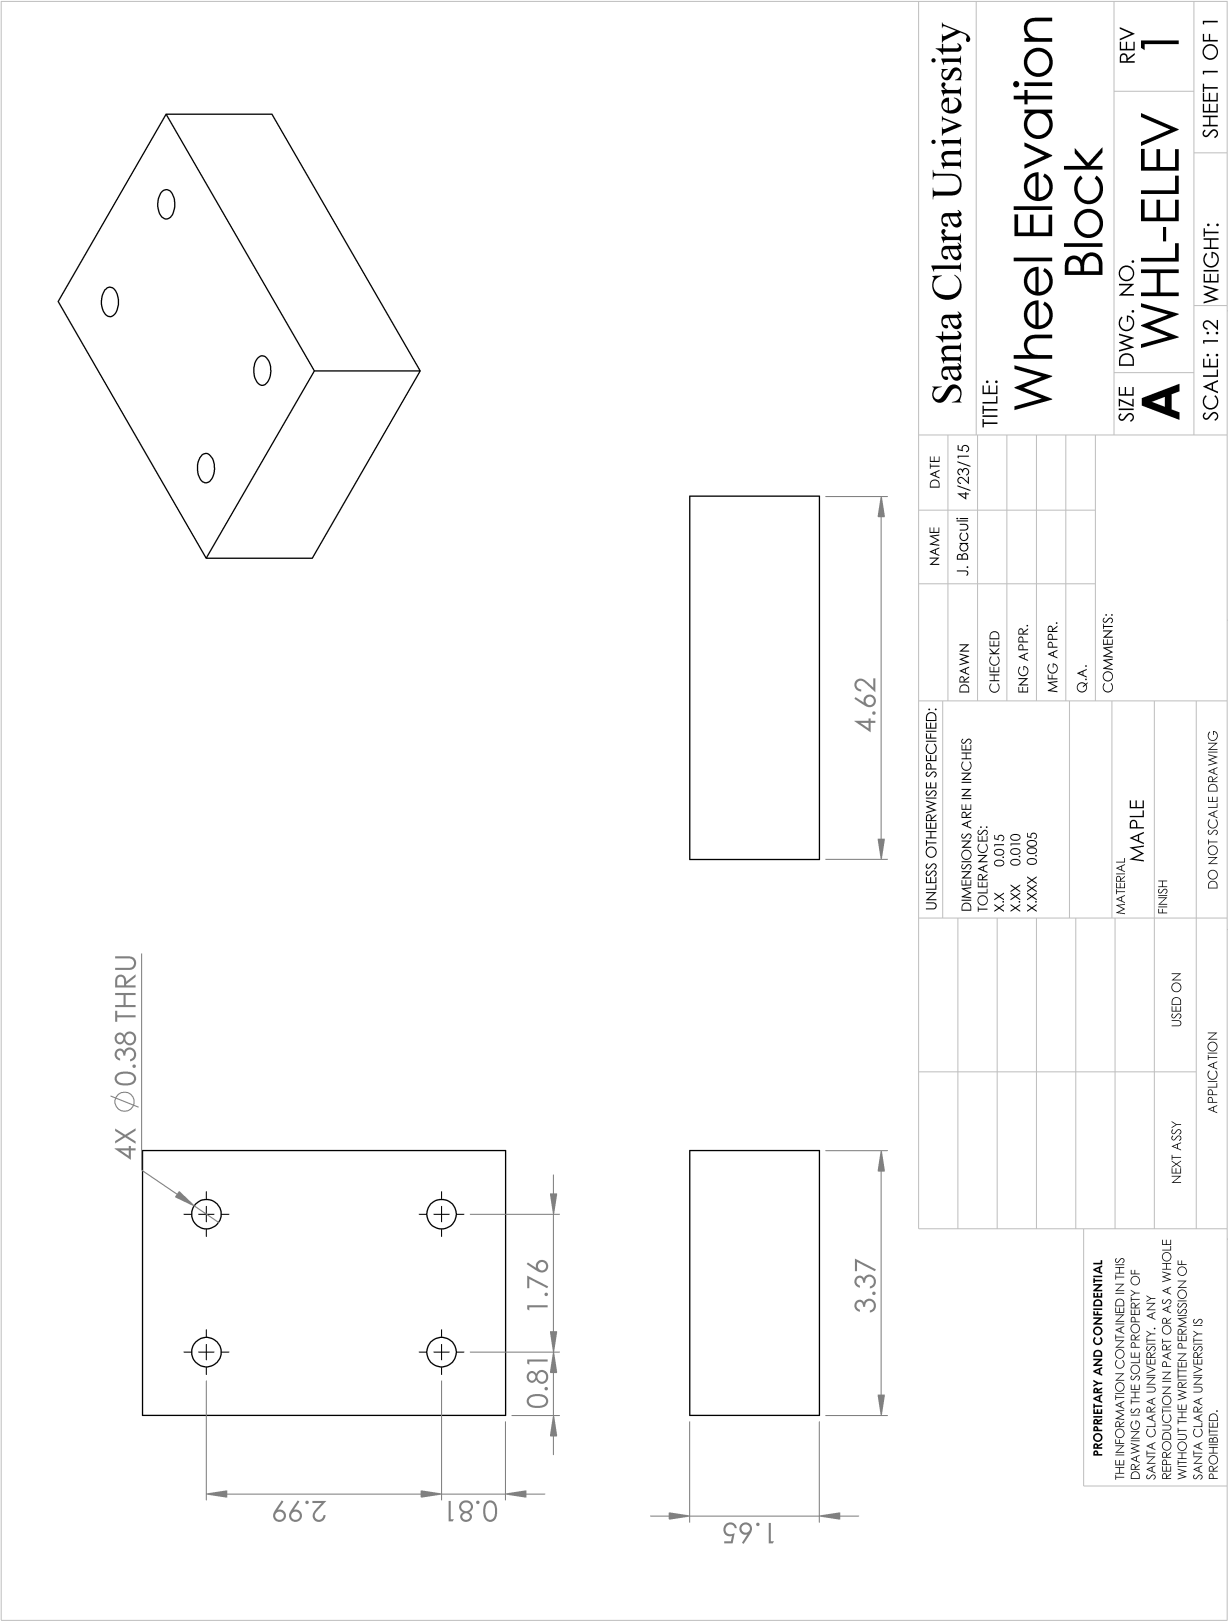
Elevation block between the caster wheels and the mounting plate to raise the overall height of the cutting mechanism.
